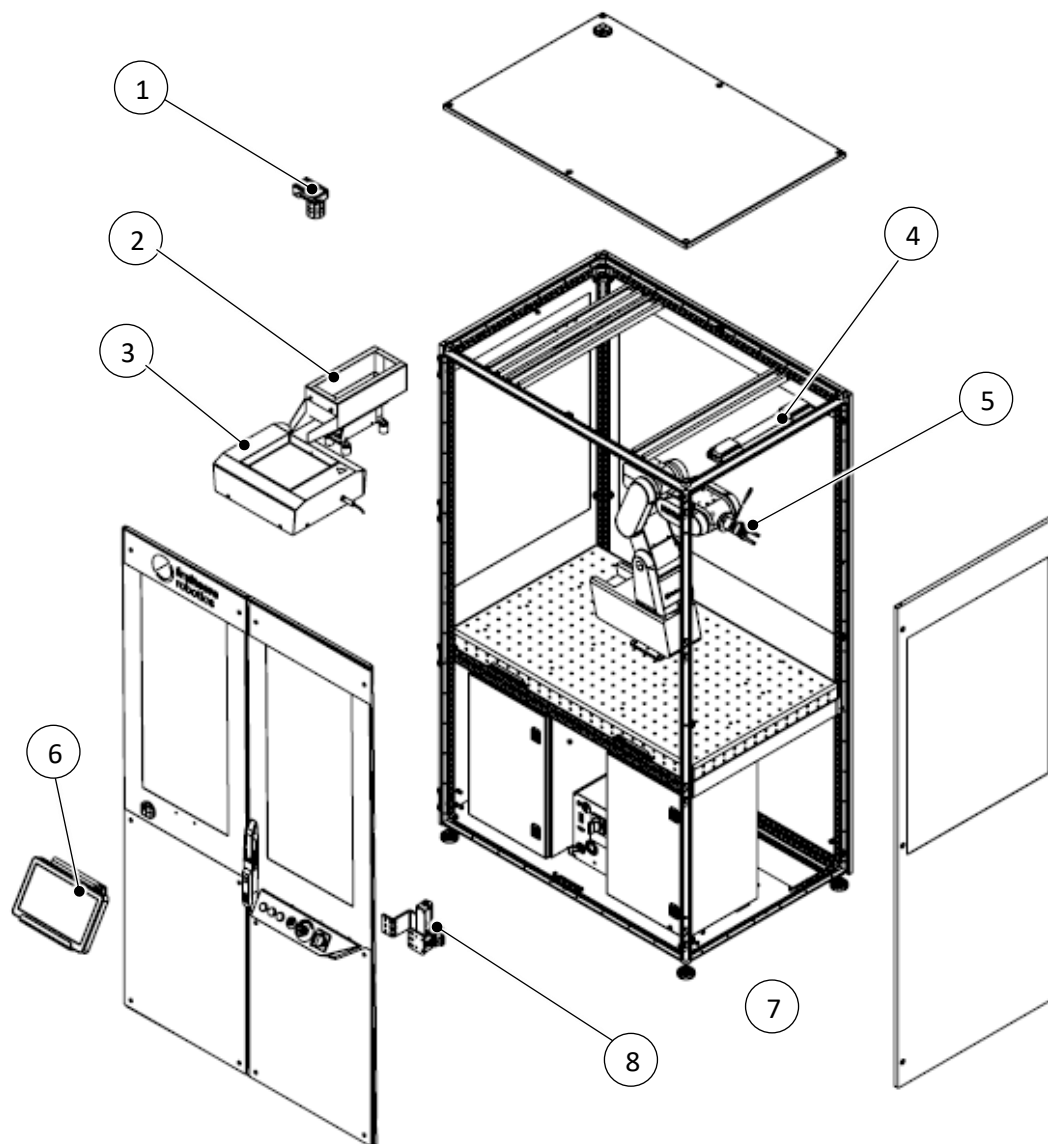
Solution Kit Part Separation – exploded view
